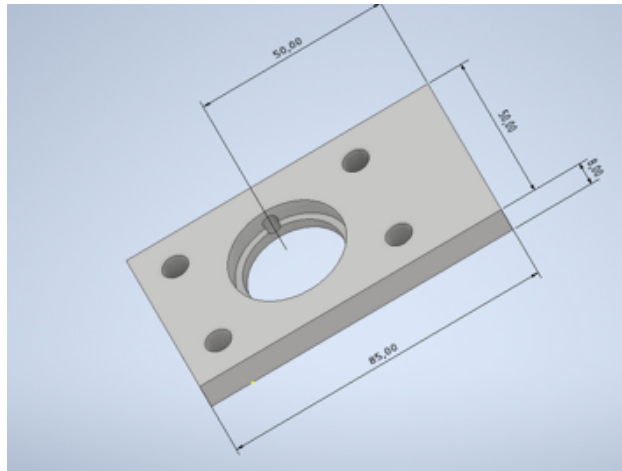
Sketch of the base plate, designed in Autodesk Inventor. The large hole in the middle fits the QWP, the other four holes are used for mounting to the chamber.
